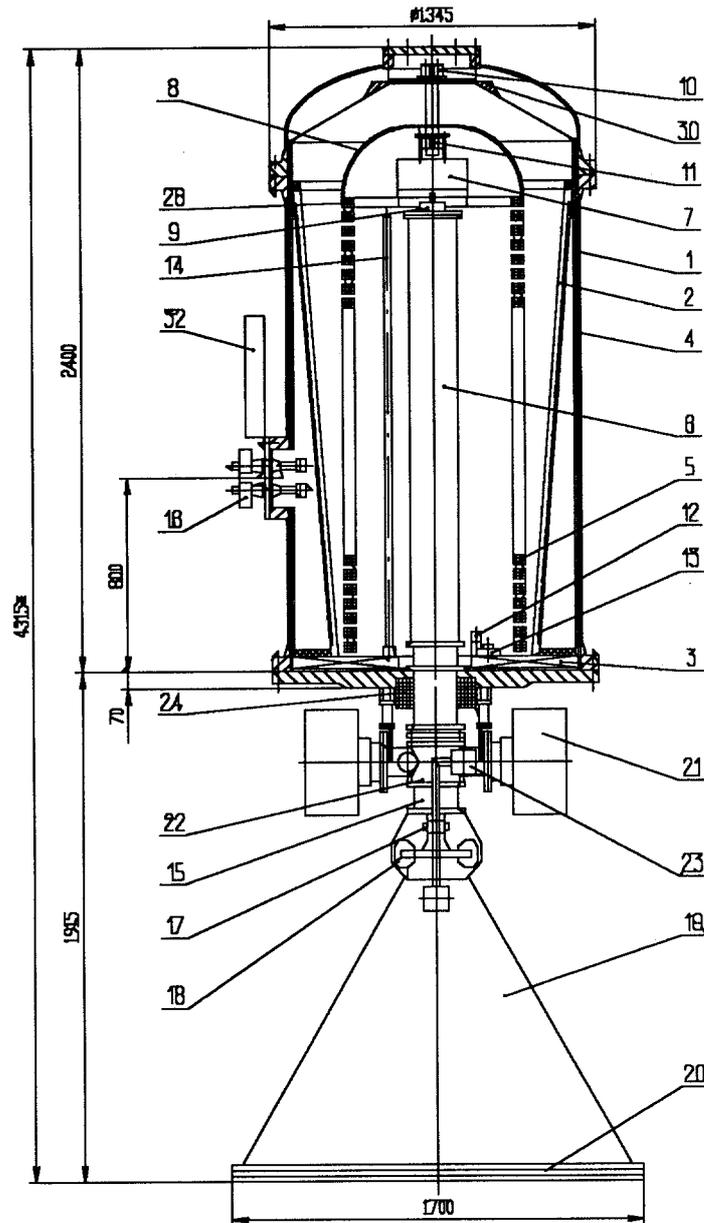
General view of ELV-4 accelerator. 1 - vessel, 2 - primary winding; 3,4 - magnetoguides; 5 - rectifier sections; 6 - accelerating tube; 7 - injector control unit; 8 - high voltage electrode; 9 - injector; 10,11 - optical channels for injector control; 12 - section divider; 13 - capacitor unit; 14 - energy divider; 15 - vacuum gate; 16 - primary winding terminals; 17,18 - scanning coils; 19 - extraction device; 20 - extraction window frame; 21 - vacuum pumps; 22 - cross head; 23 - vacuum gate; 28 - base of high voltage electrode; 29 - magnetic lens; 30 - high voltage shield; 32 - clamp set
